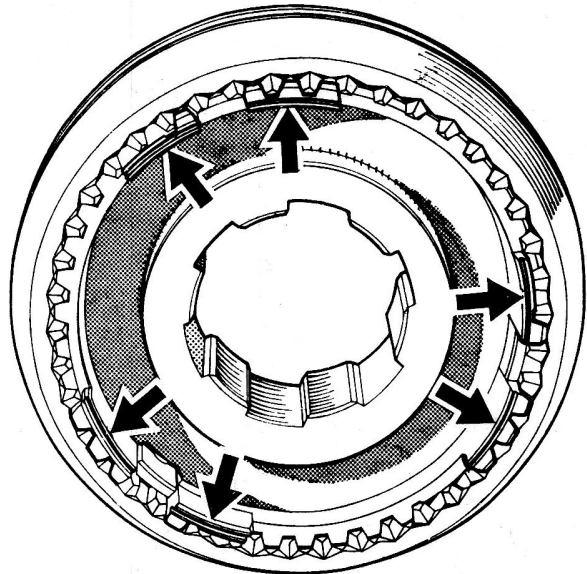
Identification grooves, 3rd/top synchro assembly
